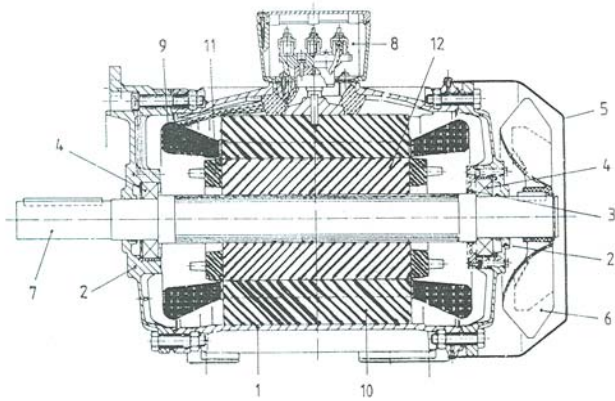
Cross section of standard induction machine (totally enclosed fan cooled squirrel cage machine), showing the main elements for foot (lower half of drawing) and flange type (upper half): 1: housing, 2: end-shield, 3: bearing lubrication, 4: bearing, 5: fan hood, 6: shaft-mounted fan, 7: shaft, 8: terminal box, 9: stator winding overhang, 10: stator iron stack, 11: rotor cage, 12: rotor iron stack (Siemens AG)
